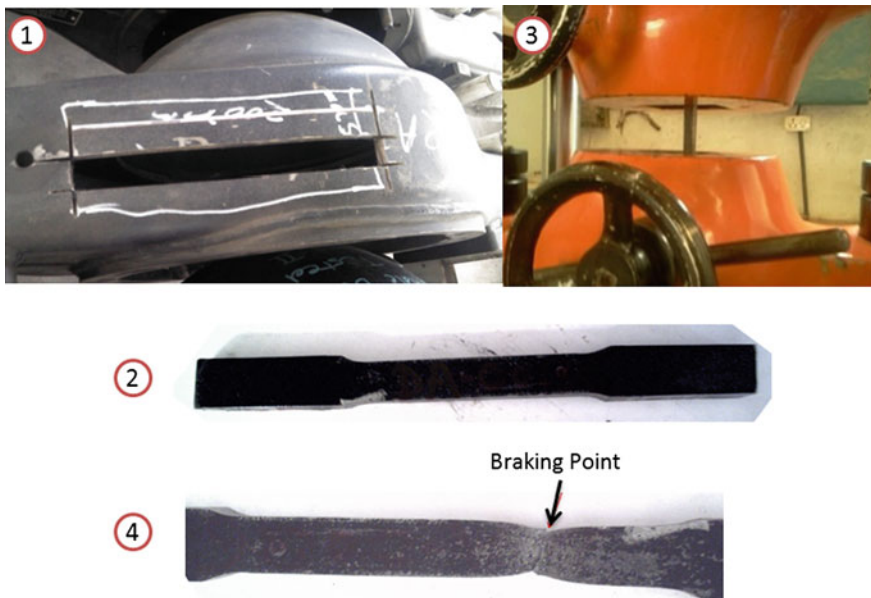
1 Banjo housing trim for tensile test specimen, 2 tensile test specimen, 3 test specimen on tensile test machine, 4 test sample after fracture
